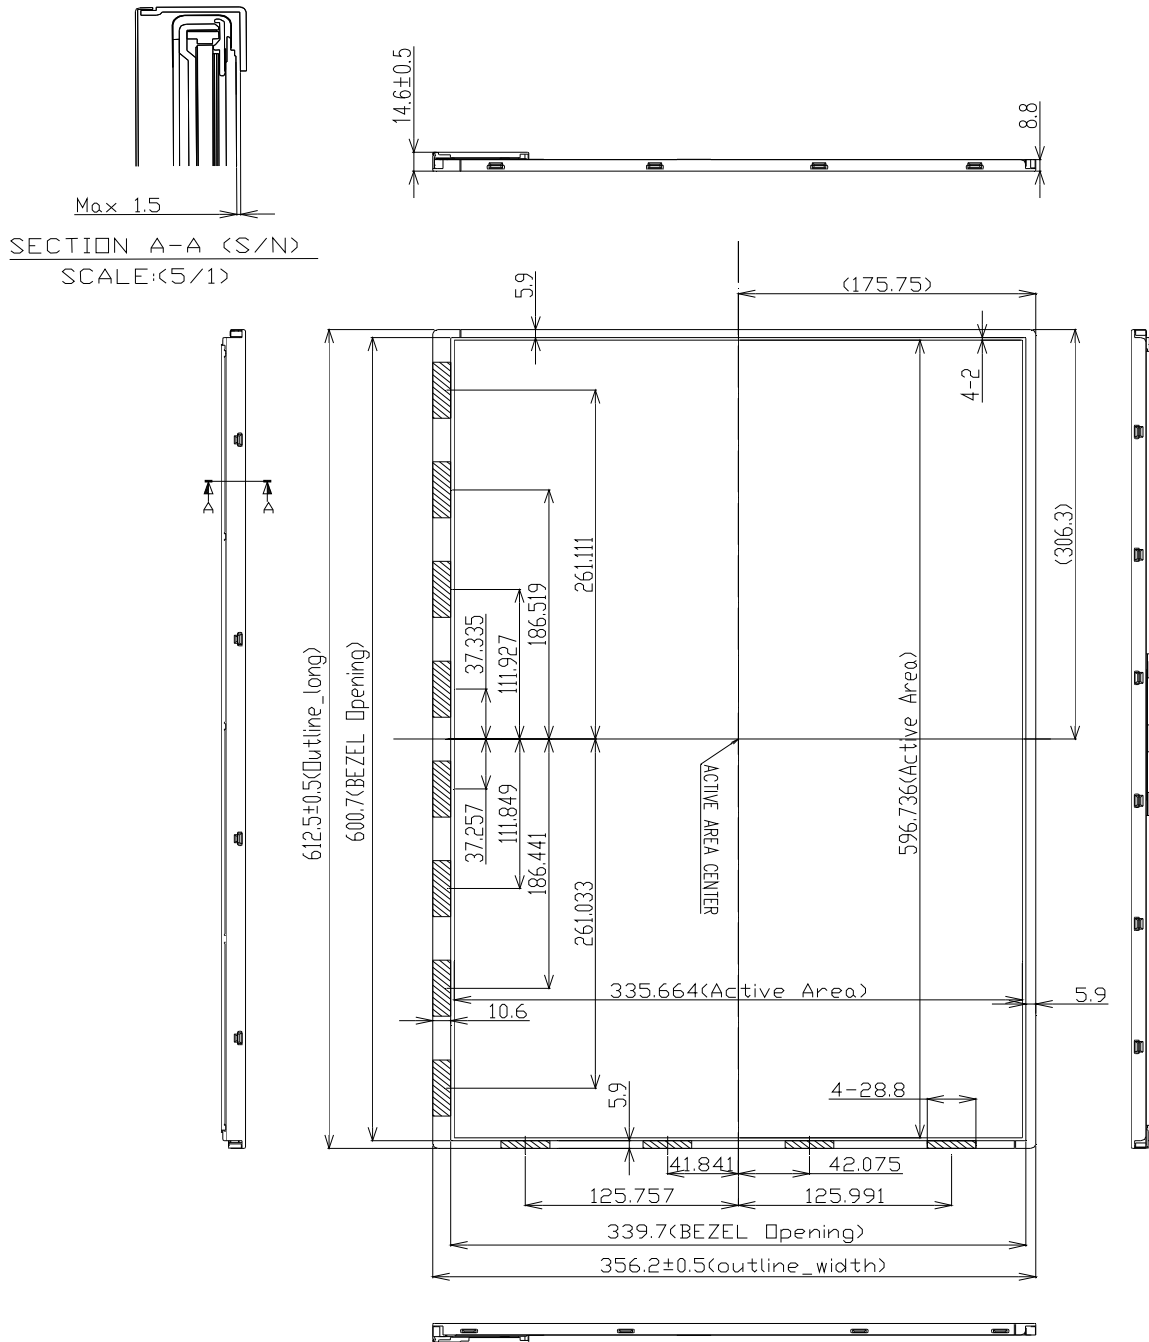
TFT-LCD Module Outline Dimensions (Rear view)
